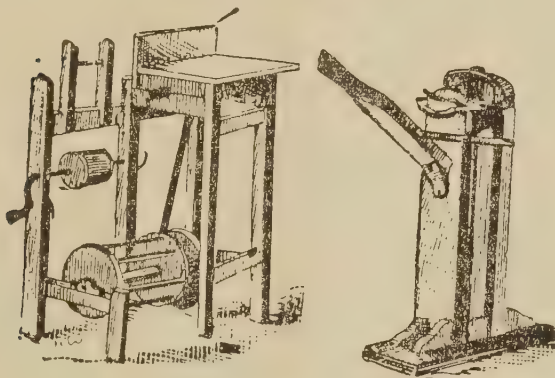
BROOM WINDER. FIG. 3.—BROOM VYCE
